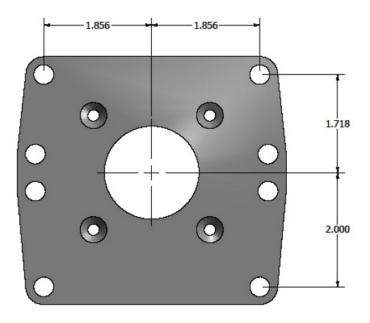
Universal Mounting Bracket (UMB) Hole Pattern
